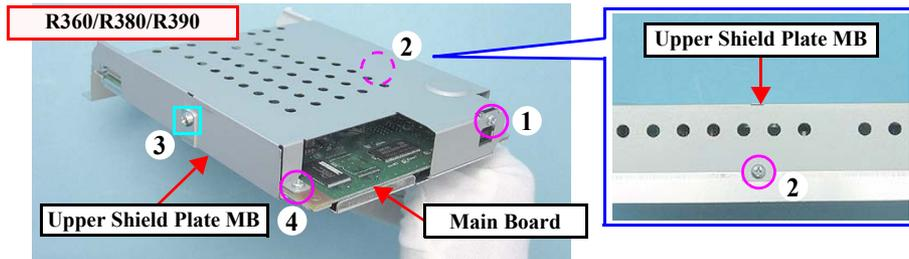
Removing the Upper Shield Plate MB (R360/R380/R390)
